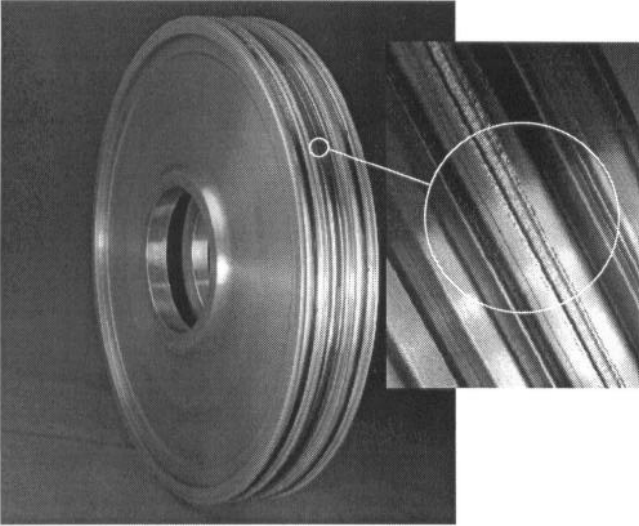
Photograph of an aeroengine compressor assembly with a close-up of the electron beam weld.
